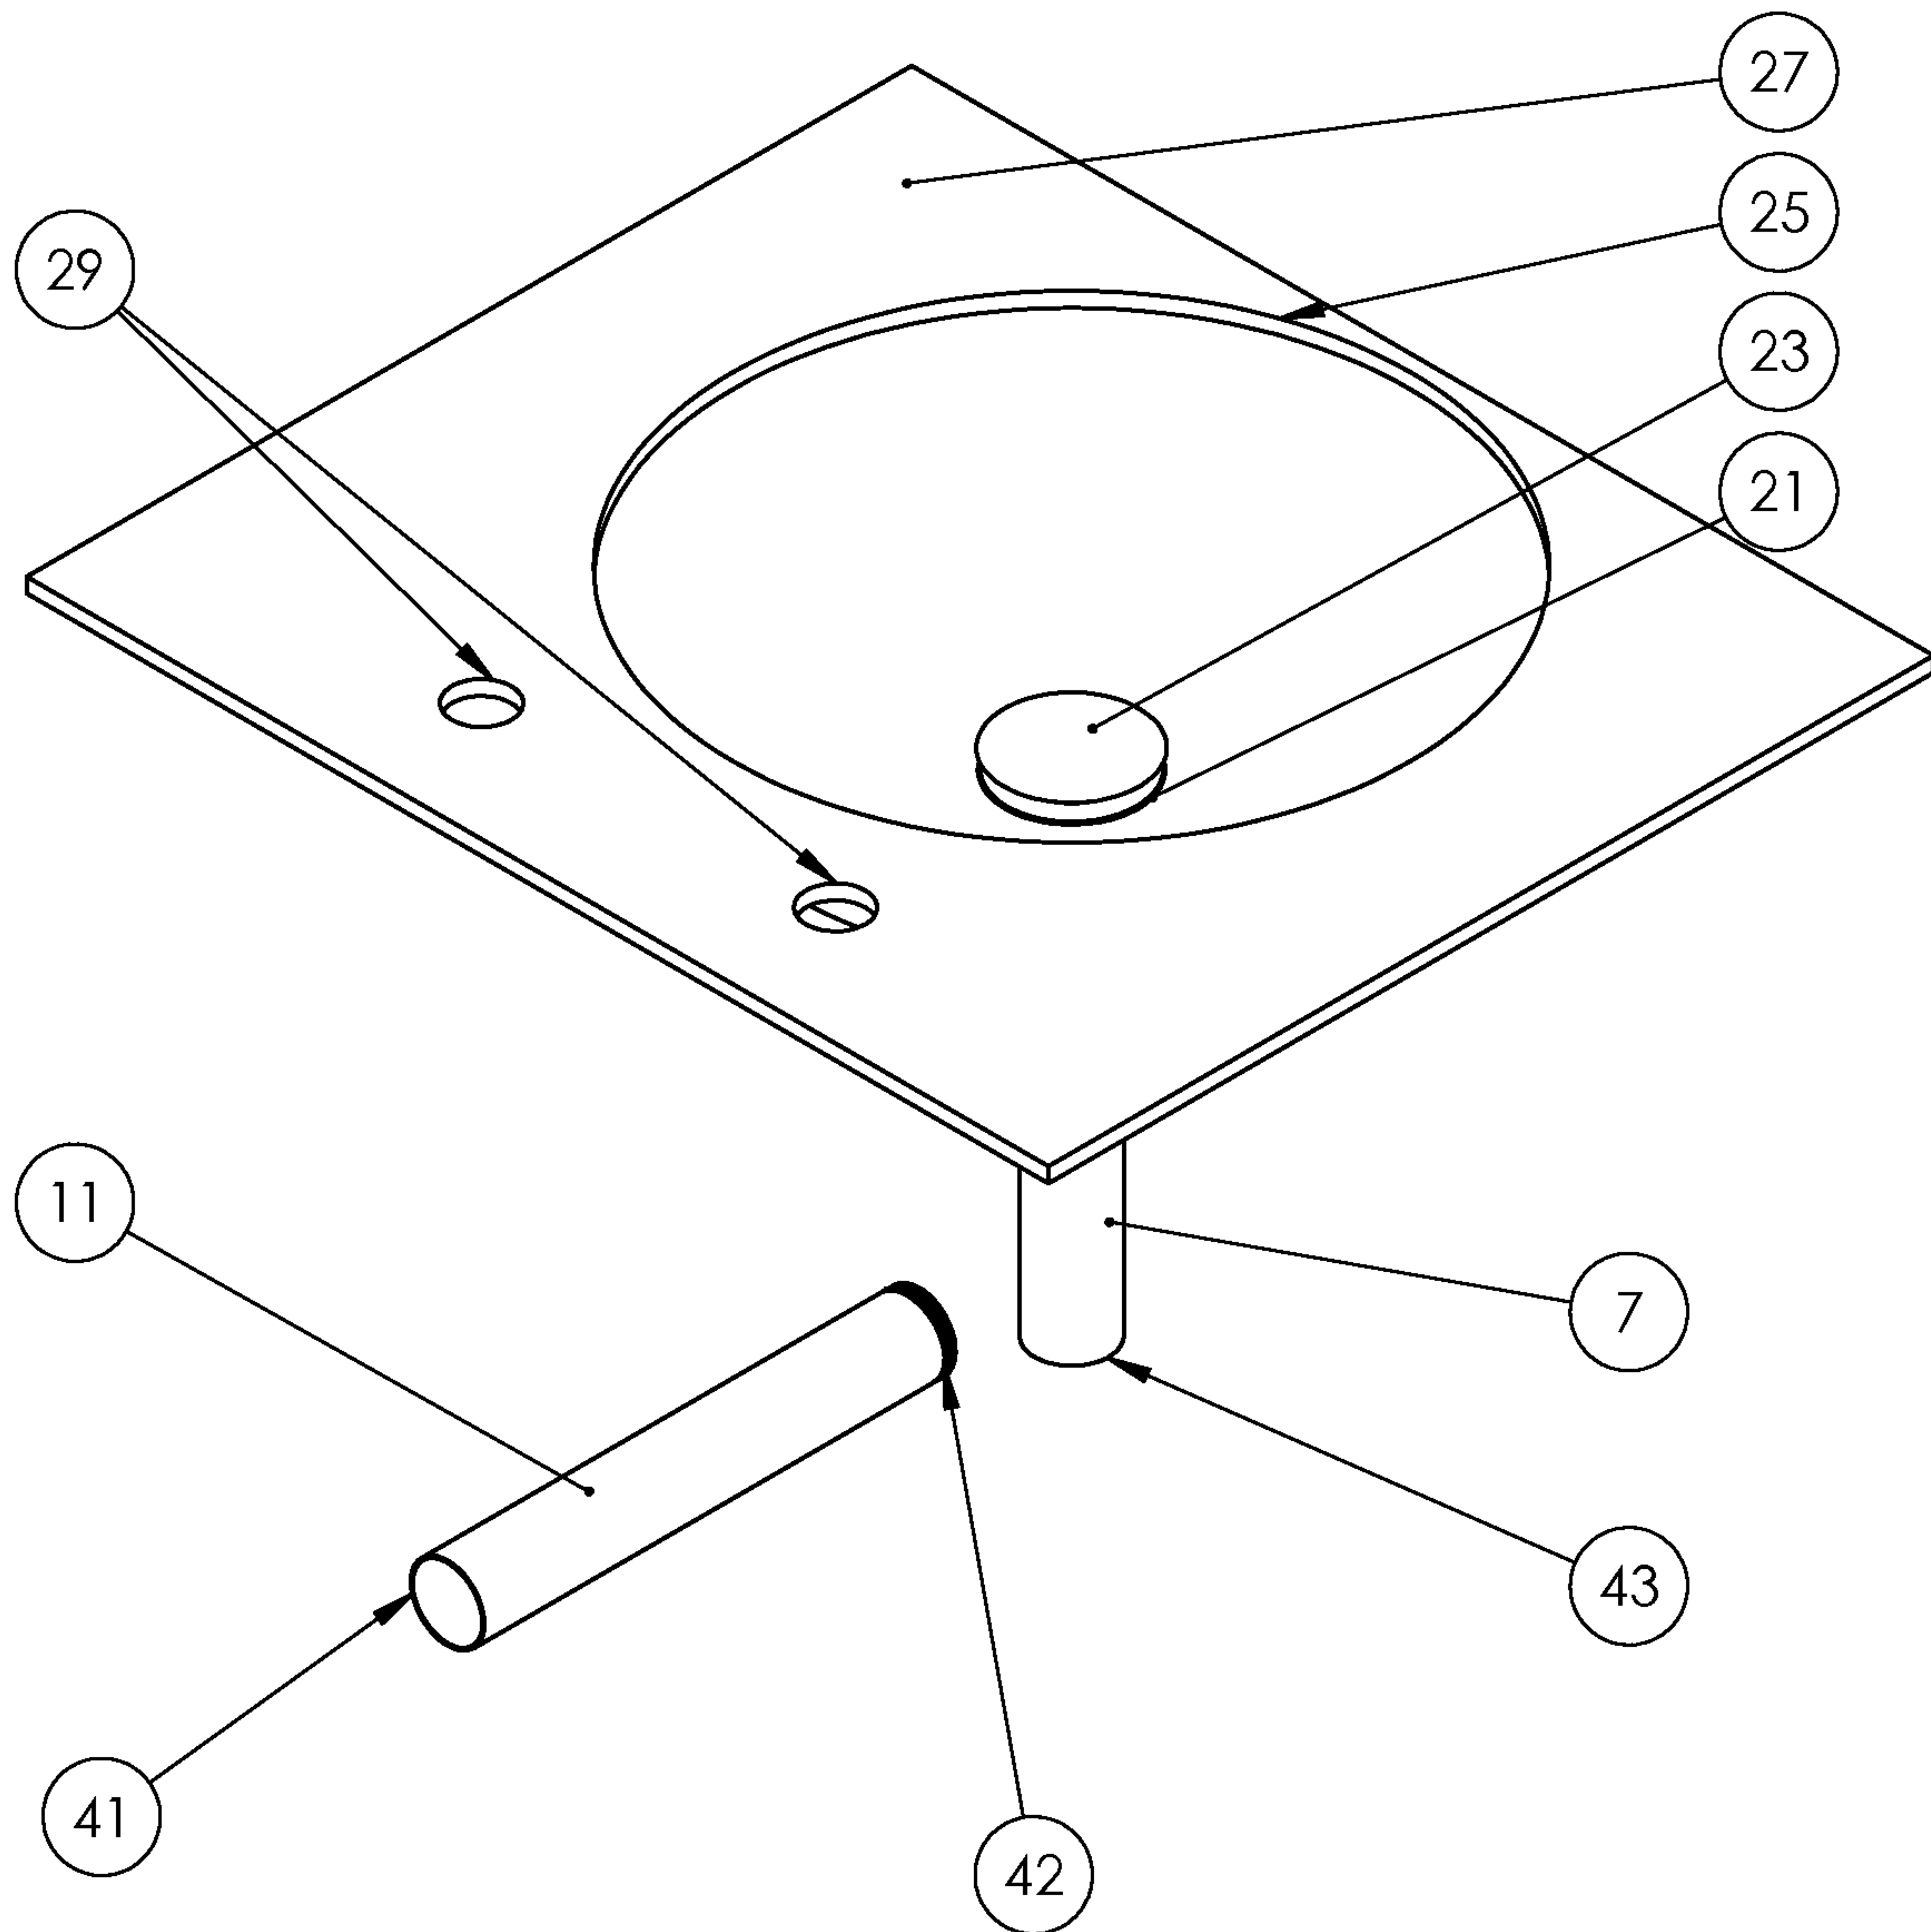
Isometric view of a lavatory sink showing vertical tailpiece and disconnected horizontal waste arm.
